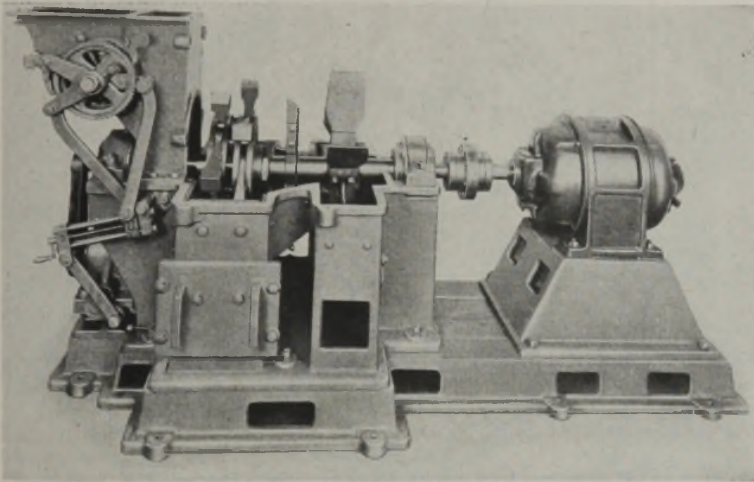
View of C-E Raymond impact mill with cover removed to show swinging hammers, fineness regulator and steel plate fan.
